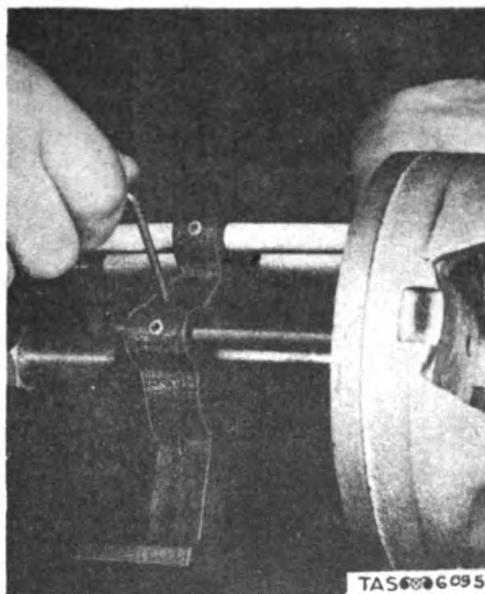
Loosening Atomizing Nozzle Pipe from Combustion Head Assembly.
